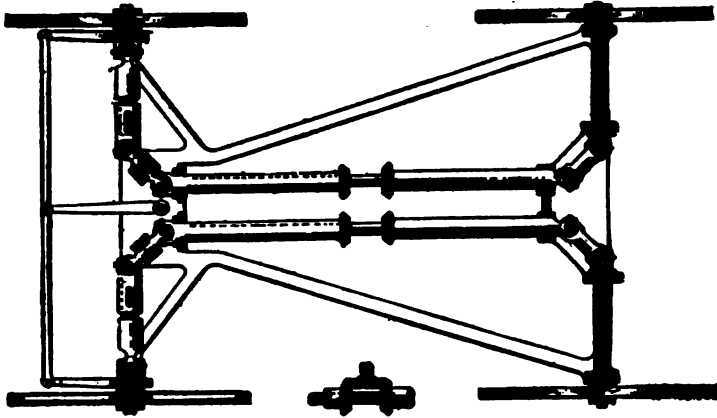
Recently Patented Device for Driving on all Four Wheels by a System of Universal joints. The steering arms are not inclined, since the wheels being driven follow their paths without slipping.
